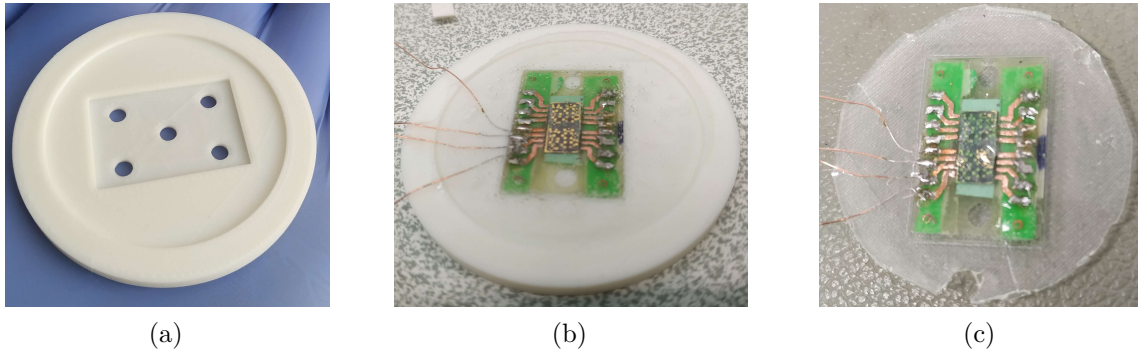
First test protecting sample with PDMS. a) 3D printed mold with inner circle presenting 20 mm radius. b) PCB insert in the mold socket after wire bonding and soldering. c) Result after removing from mold.
